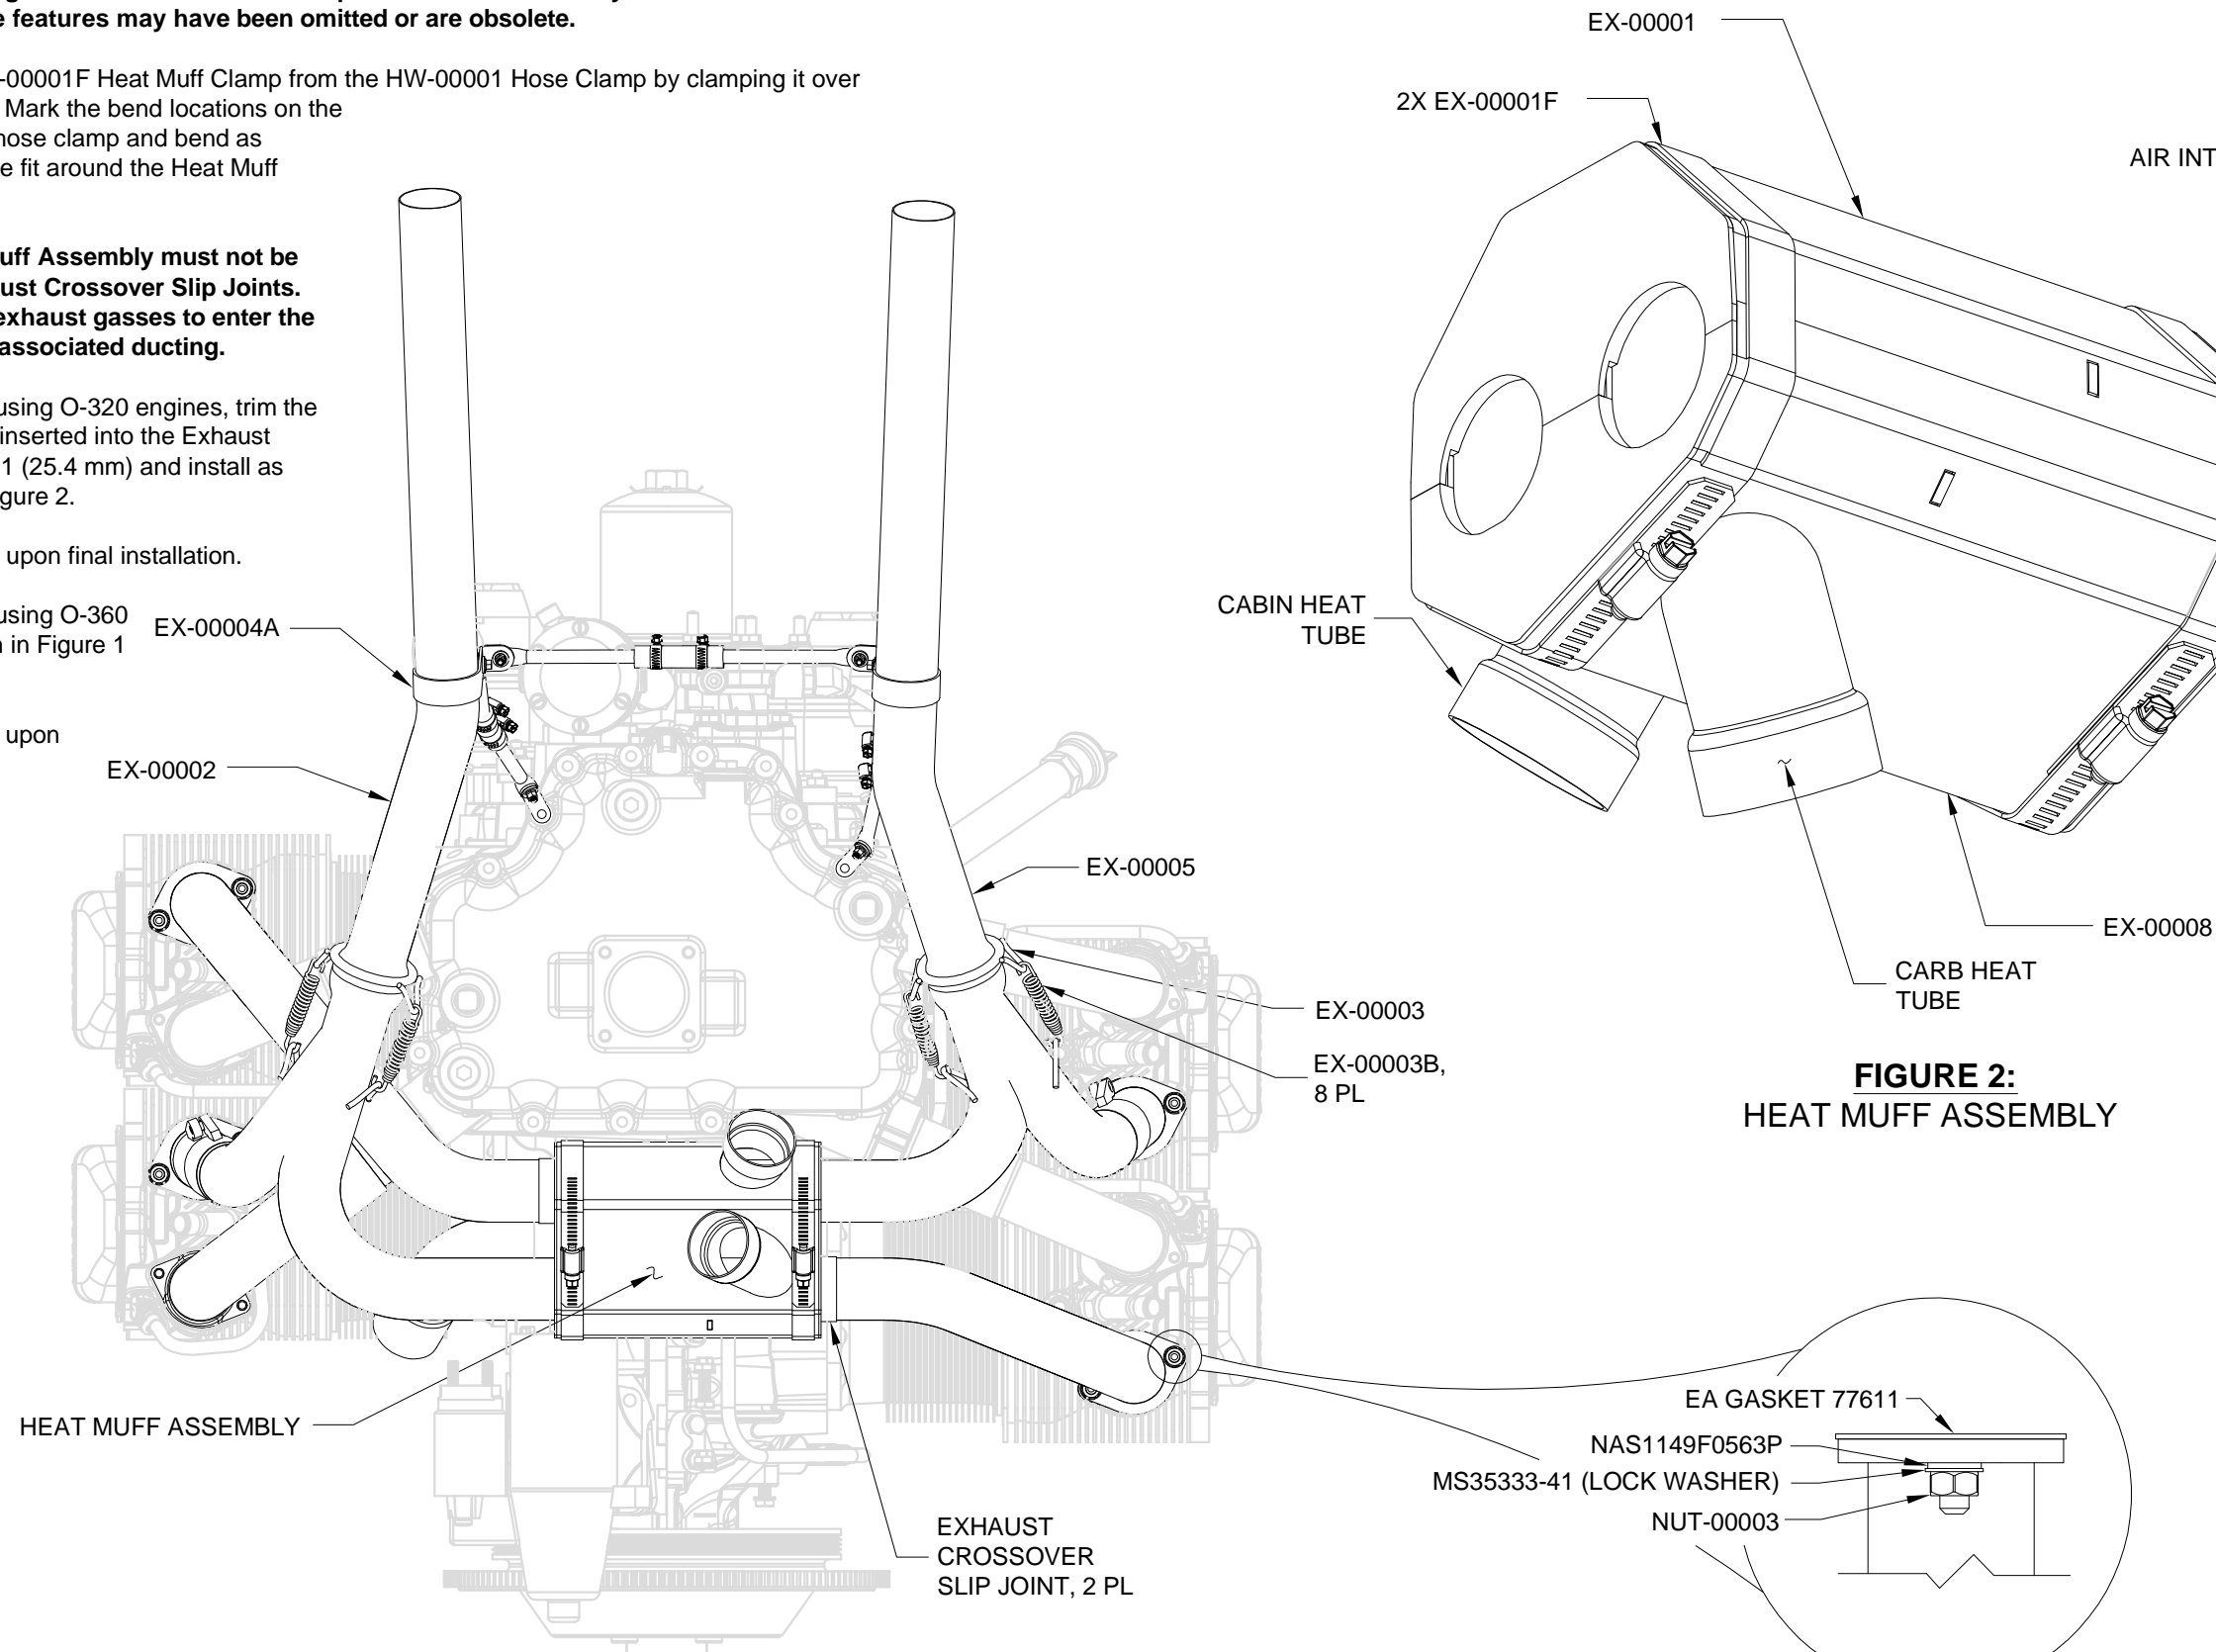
EXHAUST ASSEMBLY OVERVIEW
